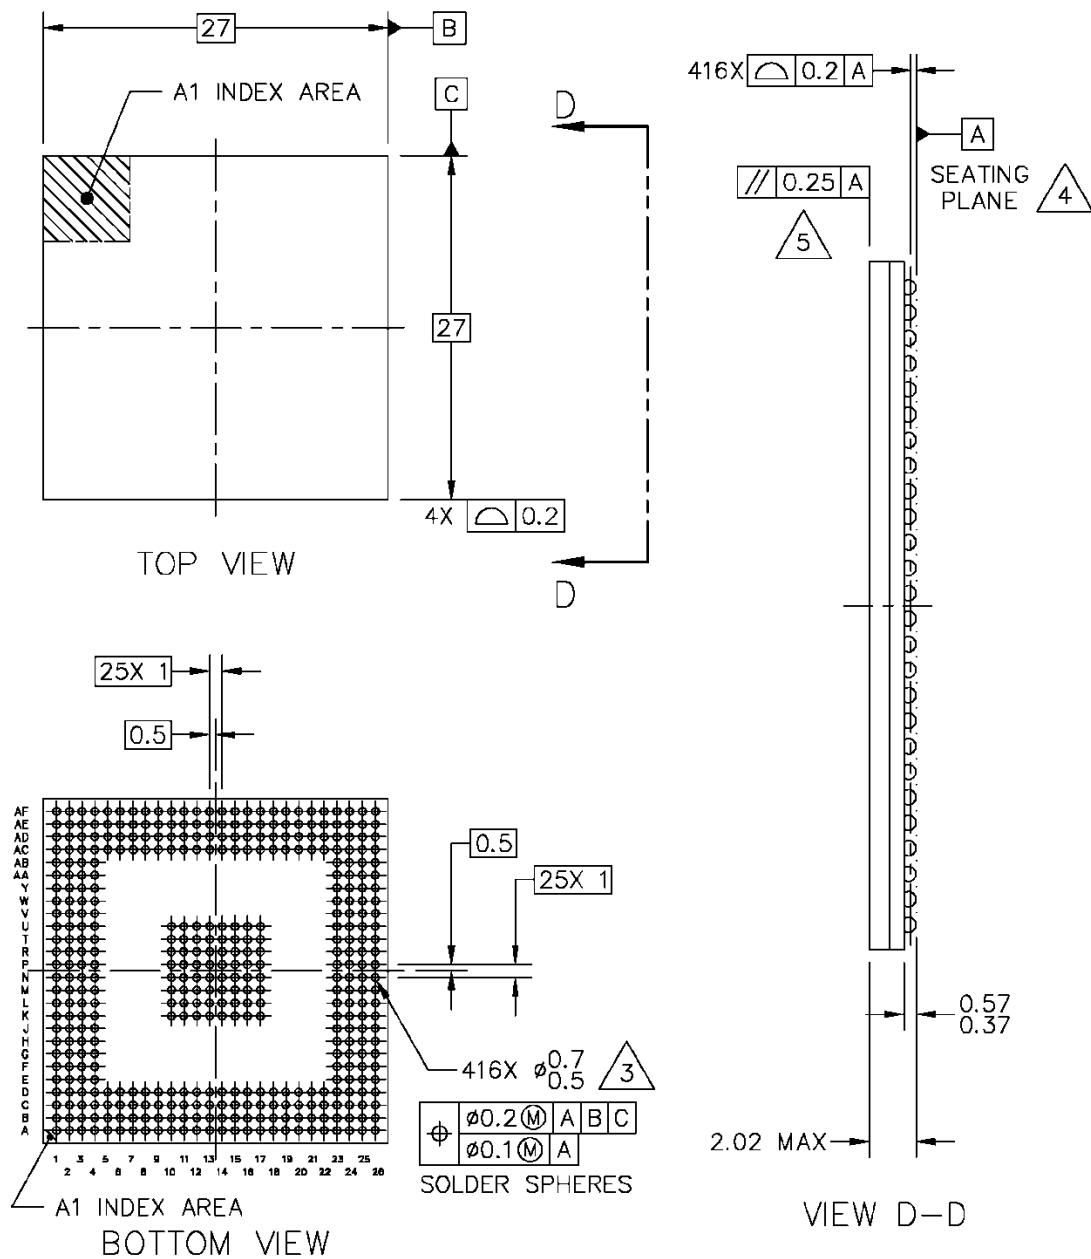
416 TEPBGA (production) package mechanical drawing(Sheet 1 of 2)
